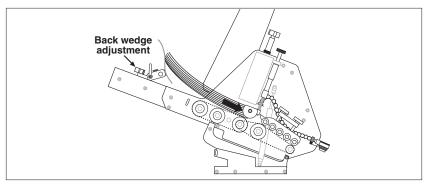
Positioning Product Prior to Loosening Back Wedge
